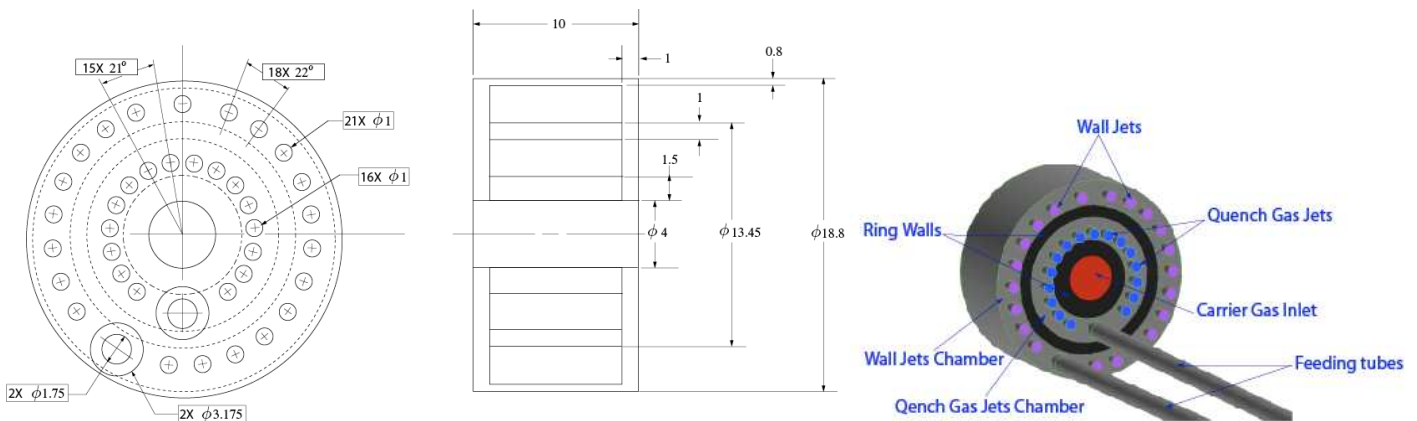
QUENCH RING GEOMETRY (DIMENSIONS ARE mm)
